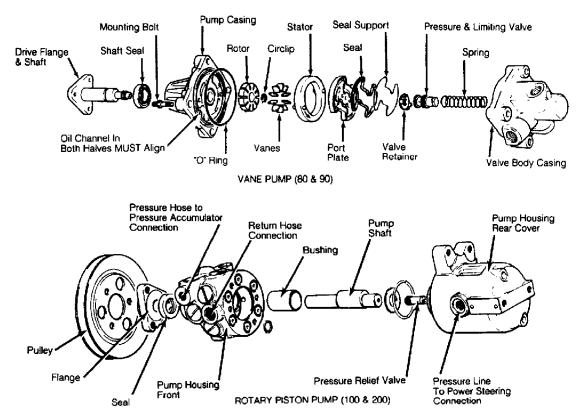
Exploded View of Steering Pump Assemblies Courtesy of Audi of America, Inc.
